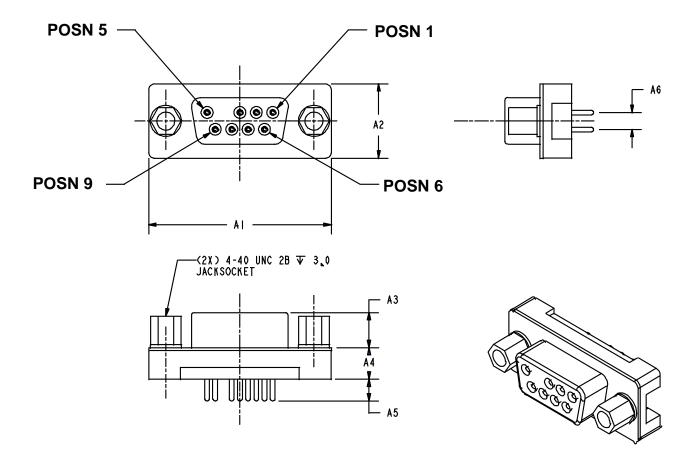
Fixed board straight through hole (version 1) overview and outline dimensions
